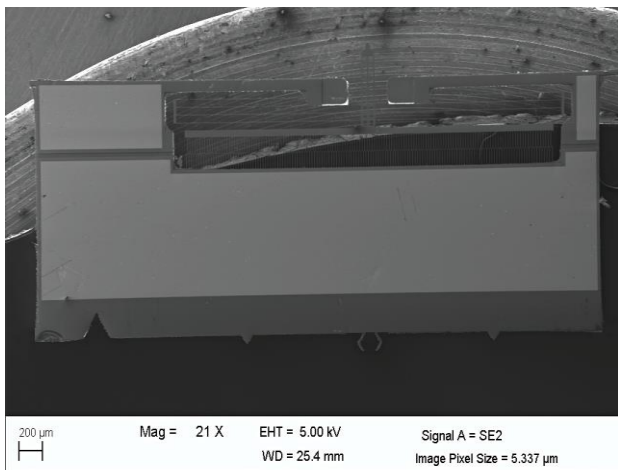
Micro-actuator with electrostatic comb-drives with breaking part, V-groove markers, and flexure springs for assembly (design B).
